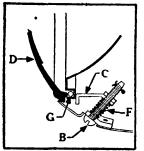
Section at bottom of headlight, showing Reflector Locking Screw "B" and Wedge "C" in proper po-sition for running.
